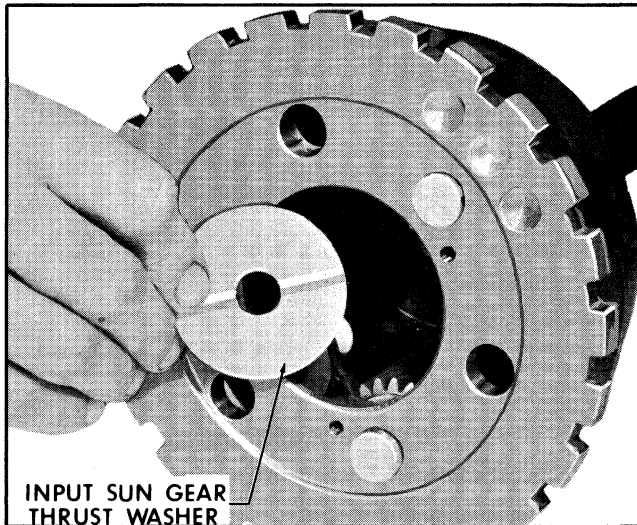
B-89 Removing Input Sun Gear Thrust Washer
